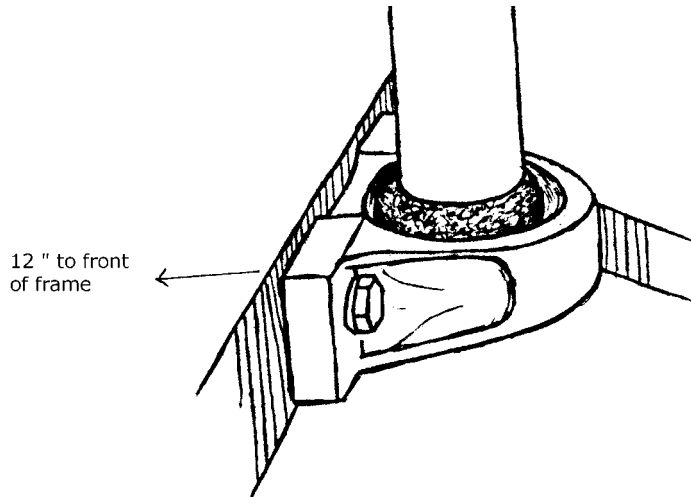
Jack shaft is fixed into pillow block which is bolted to back side of bottom angle iron. Cut 4” hole in top plate directly above this to allow shaft to extend above plate.
